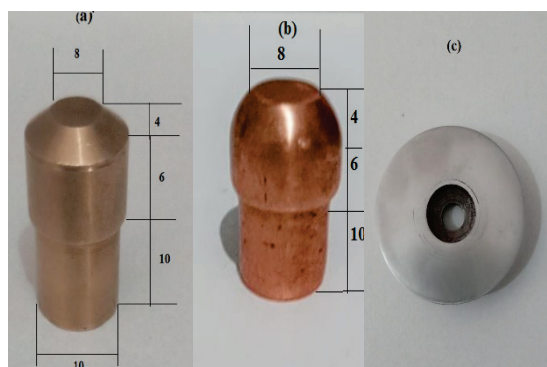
Shape of pins: (a) Brass pin. (b) Copper pin. (c) Steel disc.
